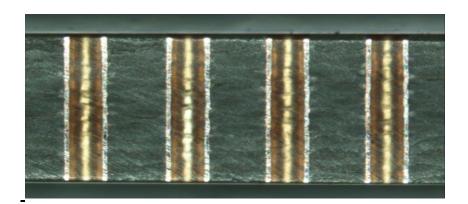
Longitudinal Section verifying plating uniformity of hole.
